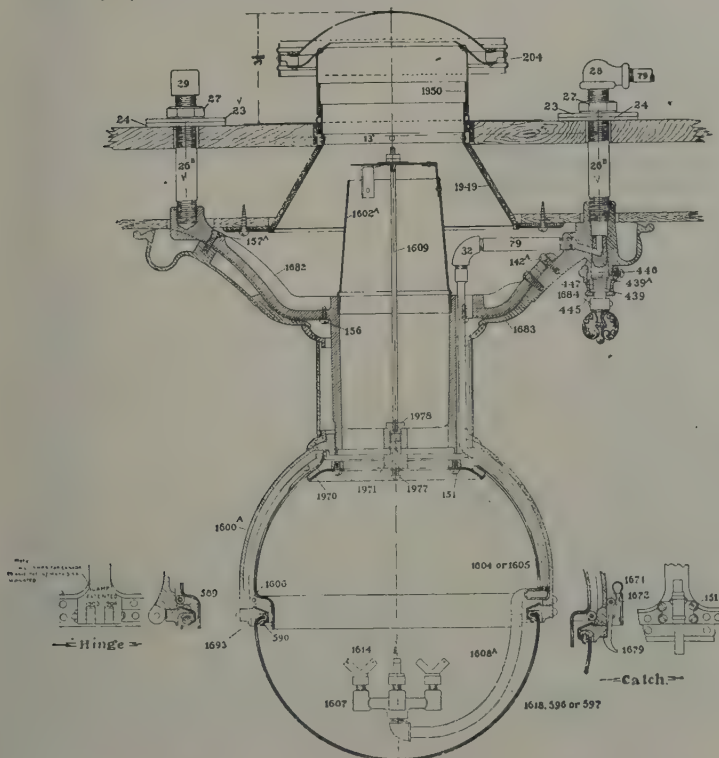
Section Through Acetylene Lamp No. 1681.
